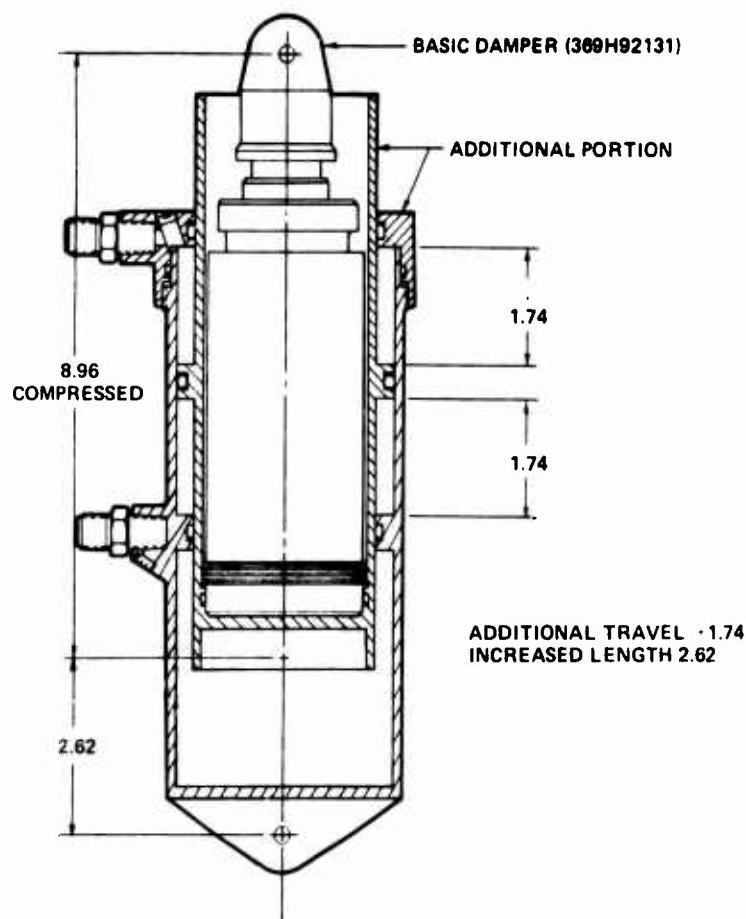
Modified Oleo Damper/Sleeve Assembly for Interconnected Landing Gear
